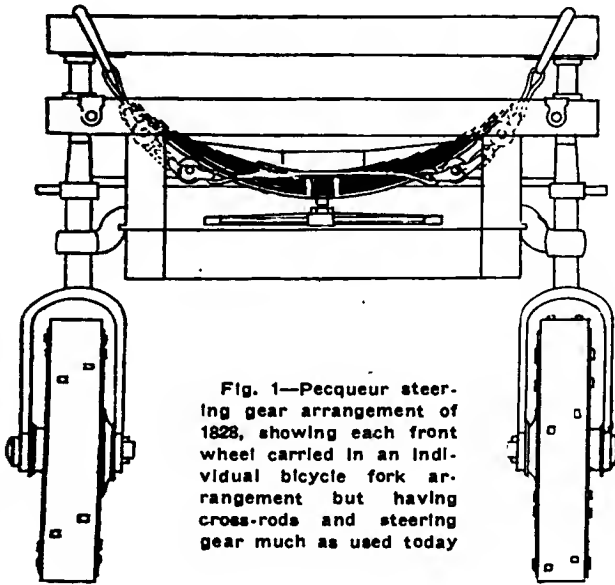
Pecqueur steering gear arrangement of 1828, showing each front wheel carried in an individual bicycle fork arrangement but having cross-rods and steering gear much as used today
